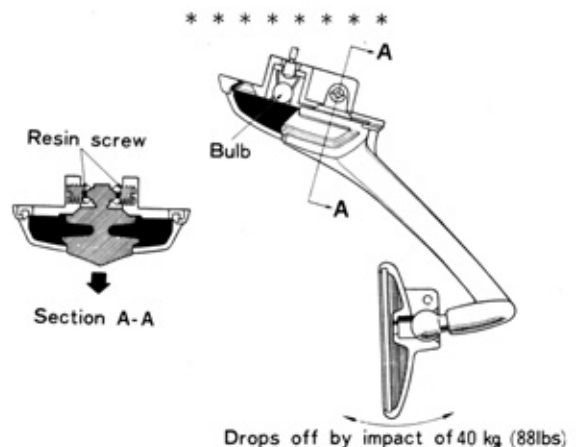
Inner Rear View Mirror with Room Lamp G 3701
